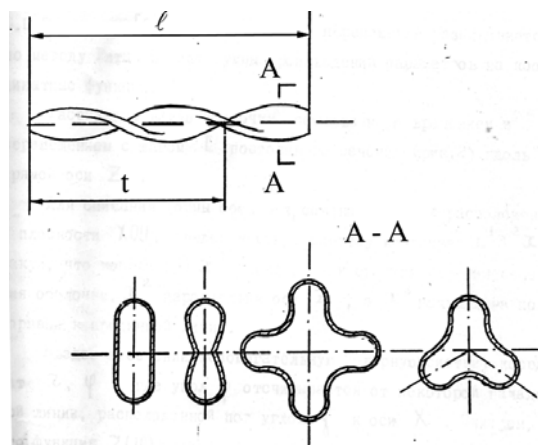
External view and cross-sections of wound tubular springs, used to measure high pressure
